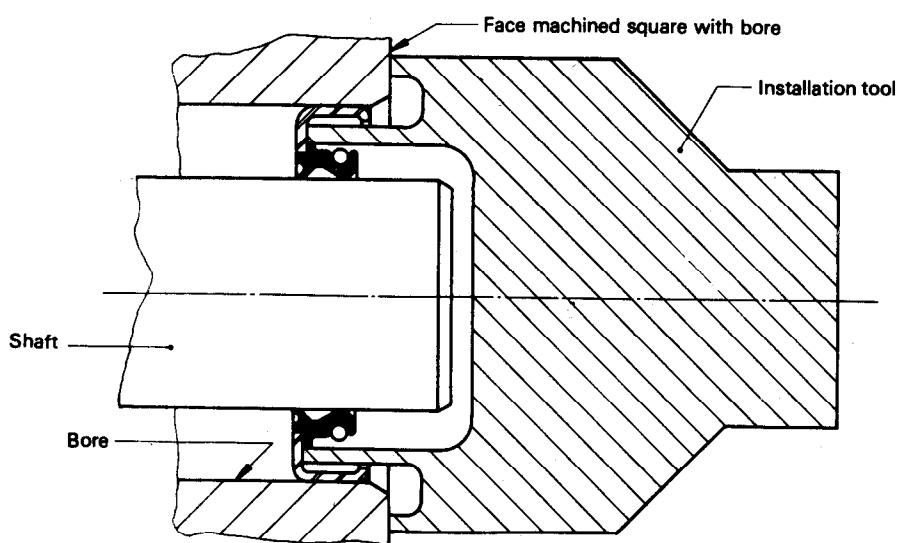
Installation of seal — Through bore : installation tool bottoms on shaft
